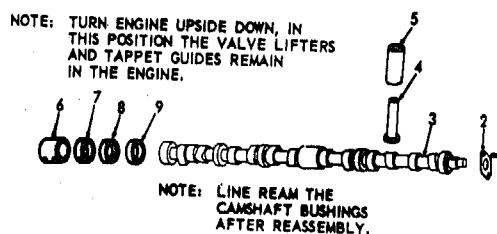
Carrier engine camshaft and bushing, removal and installation.
